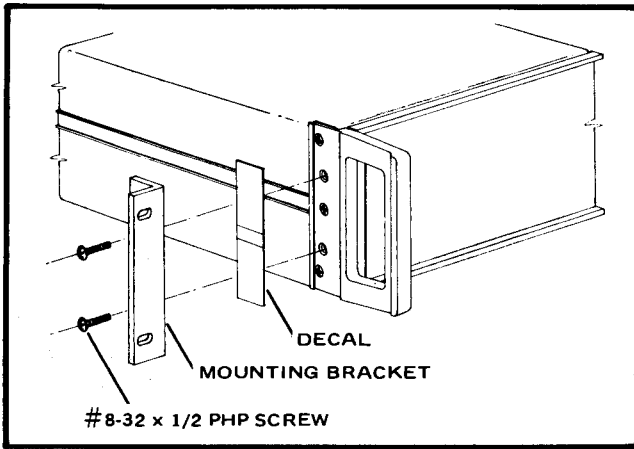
RACK MOUNTING BRACKET INSTALLATION
